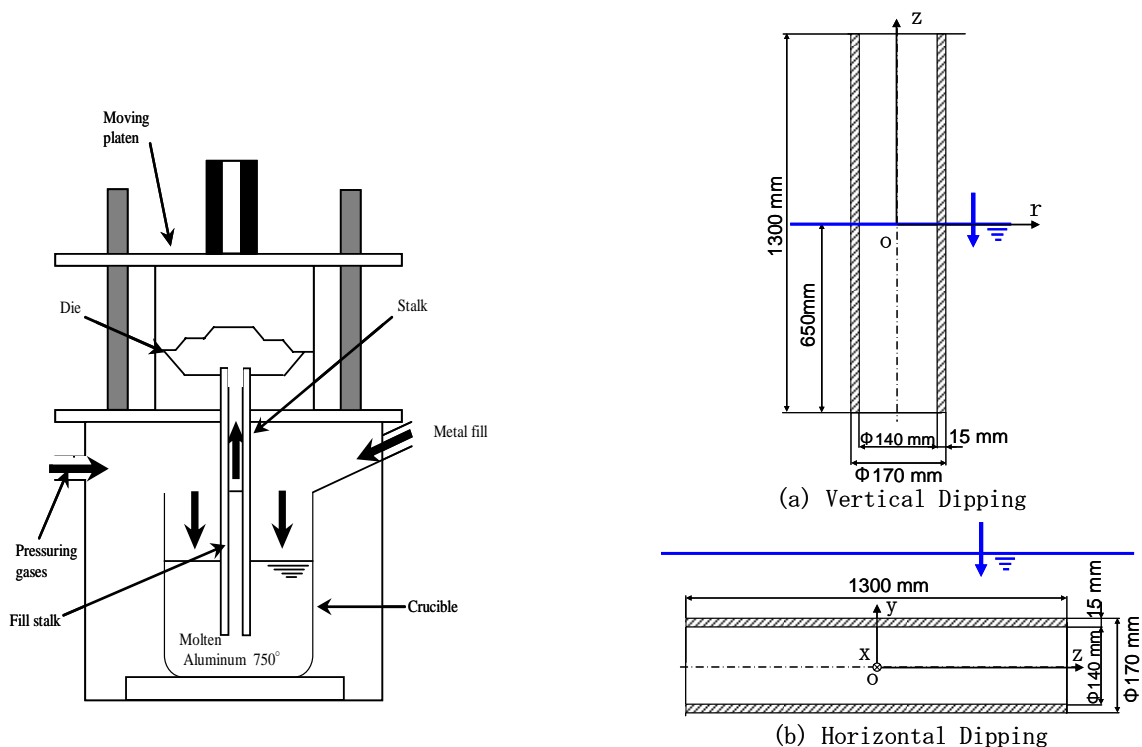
Schema of the low pressure die casting (LPDC) machine
